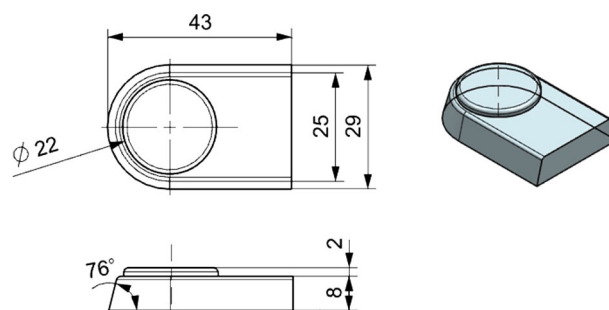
Dimensions of the resulting thixoformed sample (in mm).
